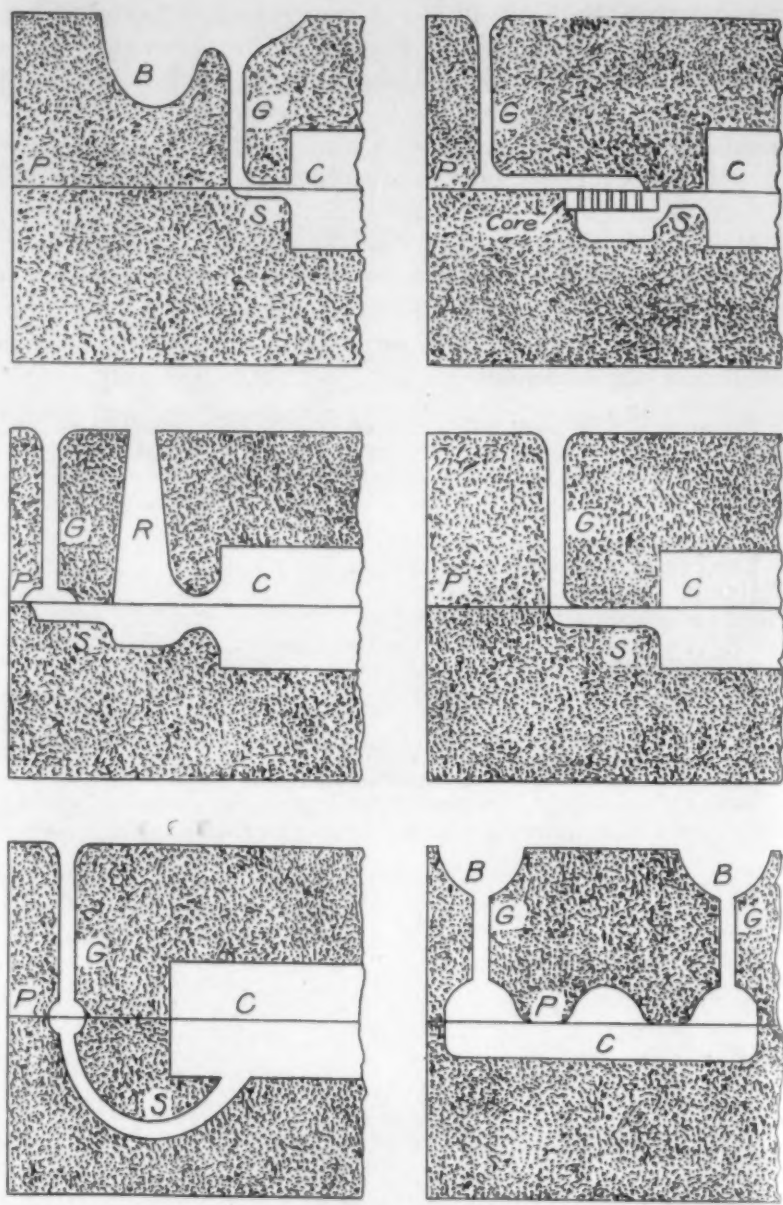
Schematic Drawings of Sections Through Molds Illustrating Several Types of Gates
